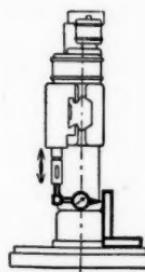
Perpendicularity of feed movement of spindle to table.
